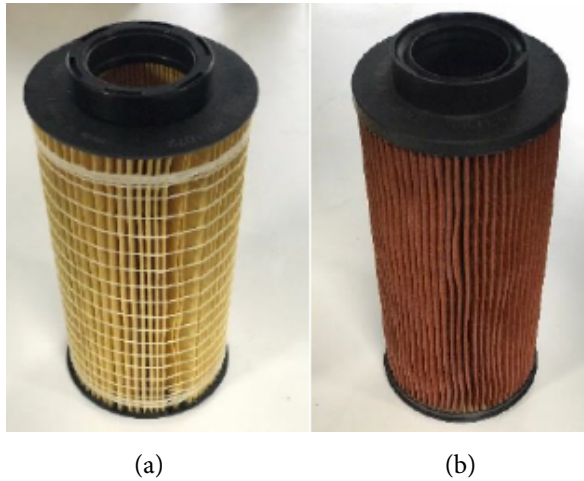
Fuel filter where the filter paper was a) IR welded b) adhesively bonded
